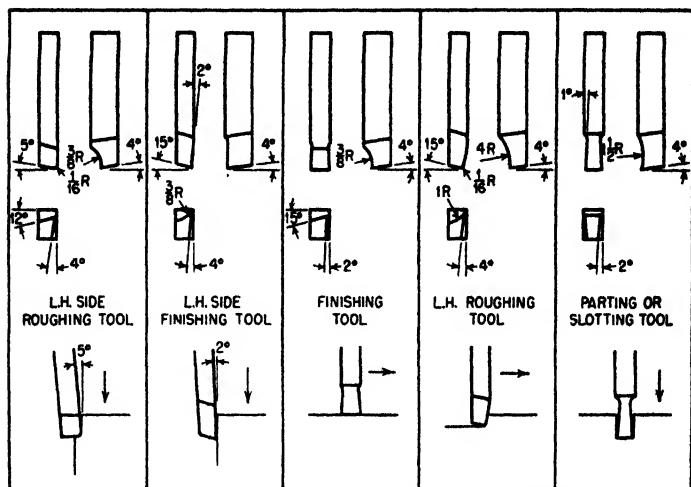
Shaper tools for cutting mild steel. (The Cincinnati Shaper Company)
